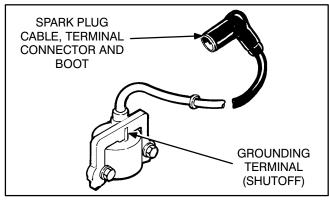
MAGNETO COIL ASSEMBLY, ELITE E140H ENGINE
